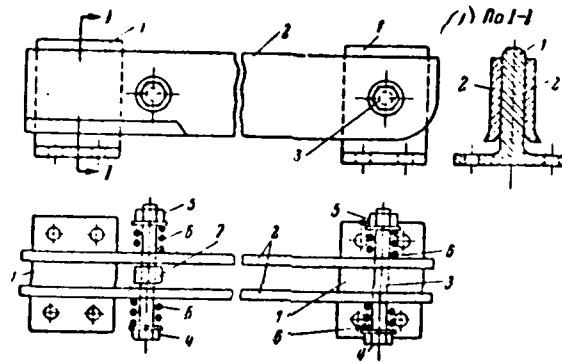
Lamellar area contacts. 1 - T-shaped contact supports; 2 - band of the slide contact; 3 - rotational axis of the bands; 4 - bolts; 5 - nut; 6 - spring; 7 - the spacer.
